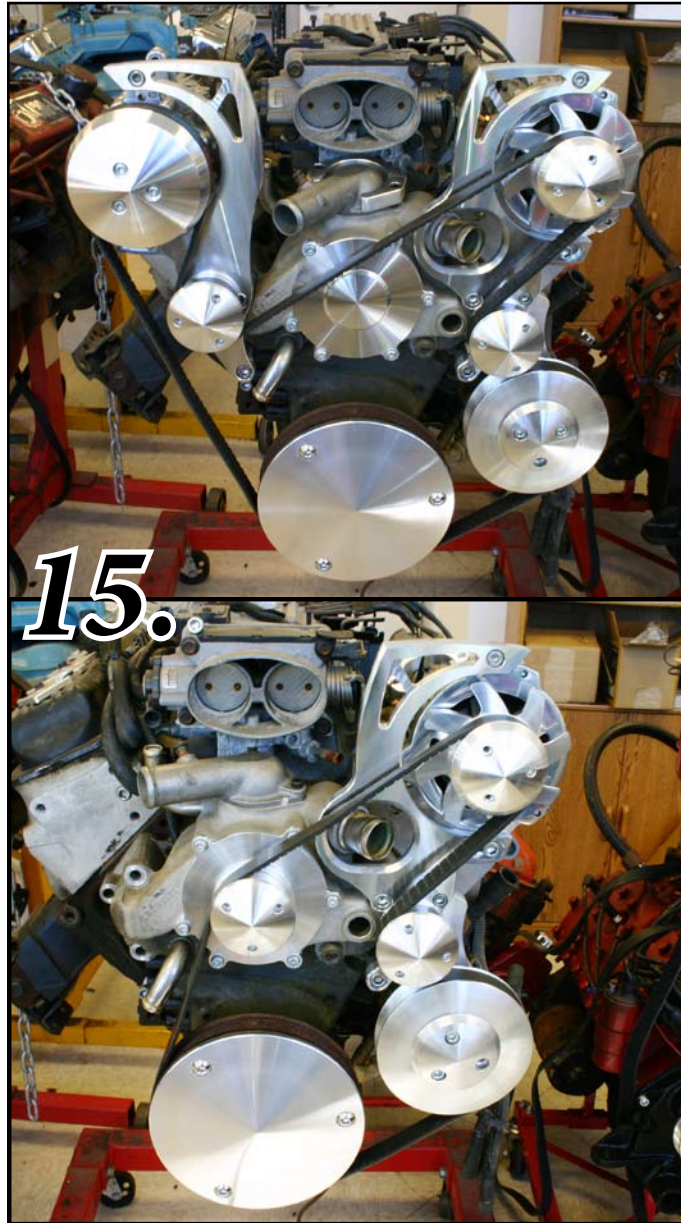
Tilt Alternator and A/C units inward at the lower slots and install the Belt, 71½" for kit 20980 and 78½" for kit 20985 (Kits with A/C) Move the A/C to the outward position and lock in place by tightening the mounting bolts. Tighten the belt to proper tension by pulling the lower Alternator mounting outward and tighten Alternator mounting bolts.
